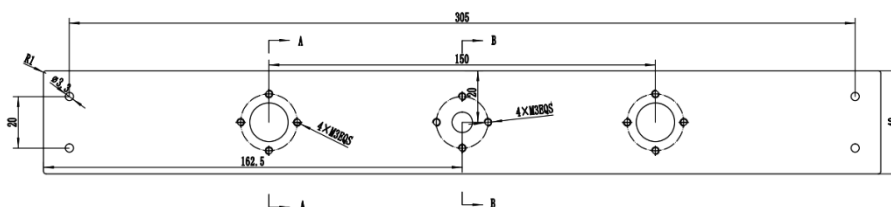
Partial design dimensions of the Z-axis connecting plate
